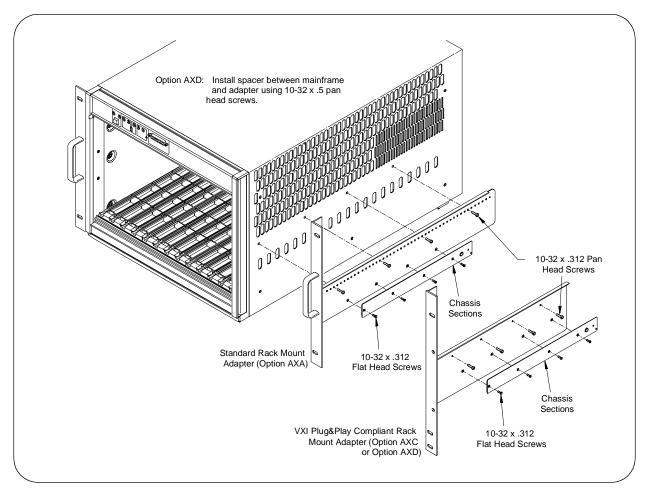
Attaching the Rack Mount Adapters and Rack Slide Chassis Sections to the Mainframe.
